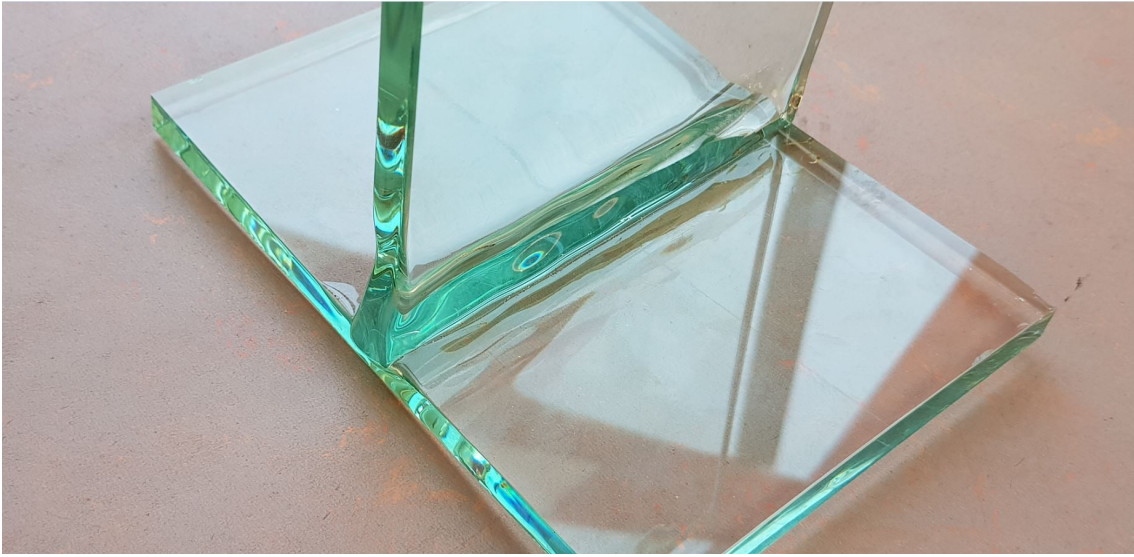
Product of the first weld experiment, close-up of the joint.
